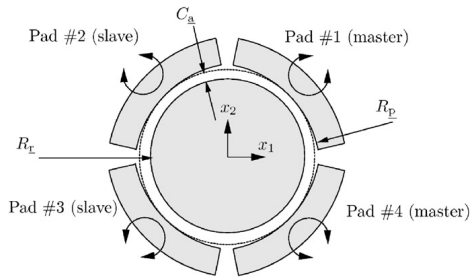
Schematic of bearing and pad numbering. The figure shows four pads supporting a rotor and indicates the radius of curvature of the rotor R_r , the radius of curvature of the pads R_p , and the assembled clearance C_a . The assembled clearance C_a is measured as the minimum gap between rotor and pad, when the pads are undeformed. Since the gap is small compared to the radii of curvature, it can be defined as perpendicular to either the rotor or the pad. The difference is negligible. The pivoting motion of the pads is indicated. A detailed description of pad boundary conditions is given in [28].
